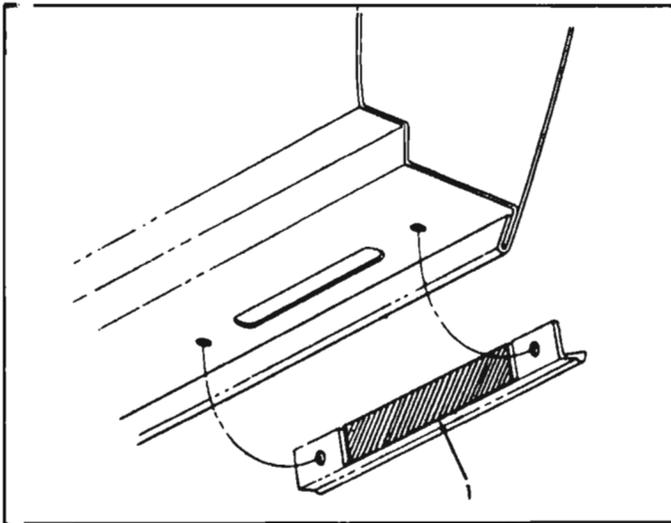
Door Bottom Drain Hole Sealing Strip
